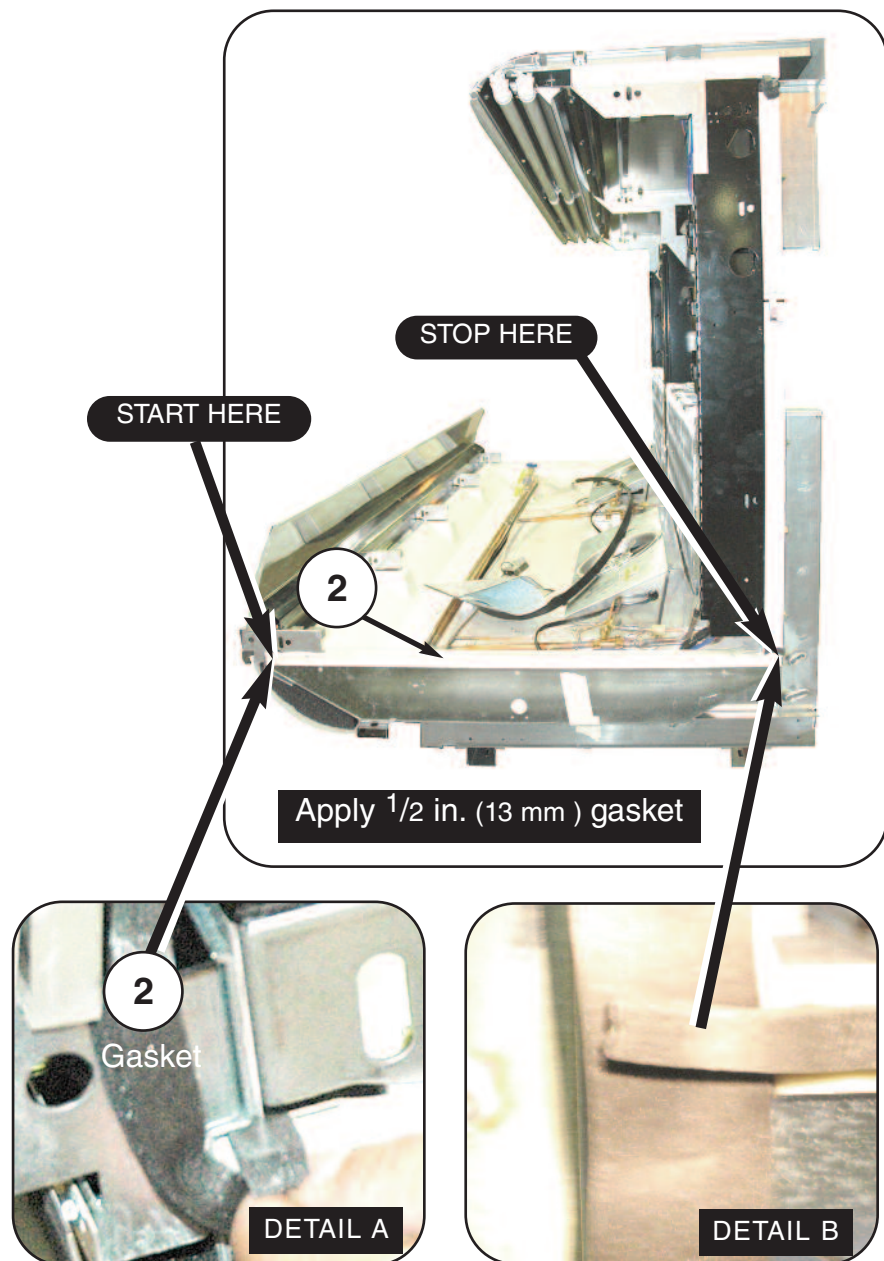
Apply 1/2 in. Gasket to the Merchandiser
